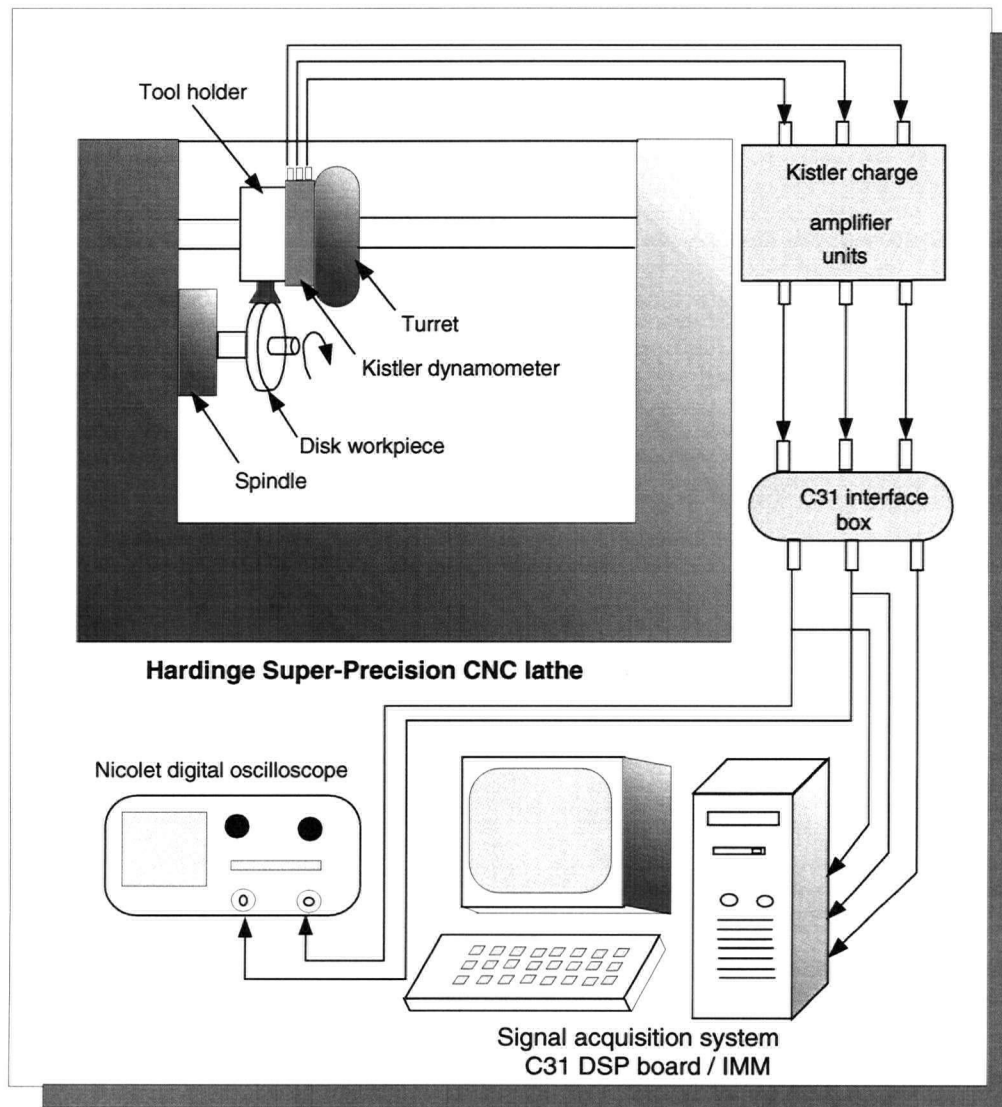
Diagram of experimental setup for orthogonal machining of P20 mold steel
